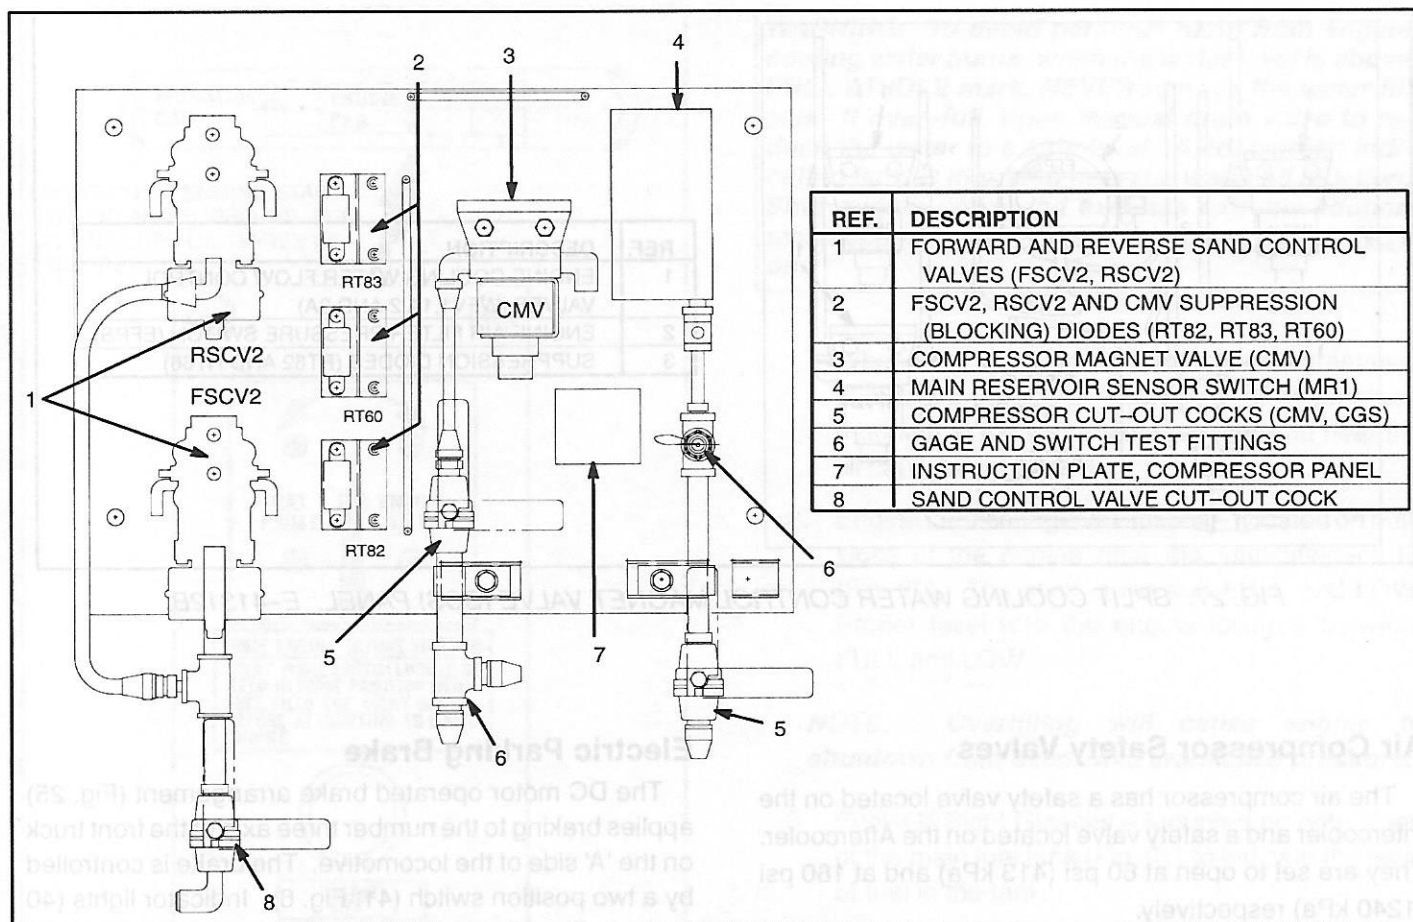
AIR COMPRESSOR CONTROL PANEL (CCP) AND PIPING. E-43323.
